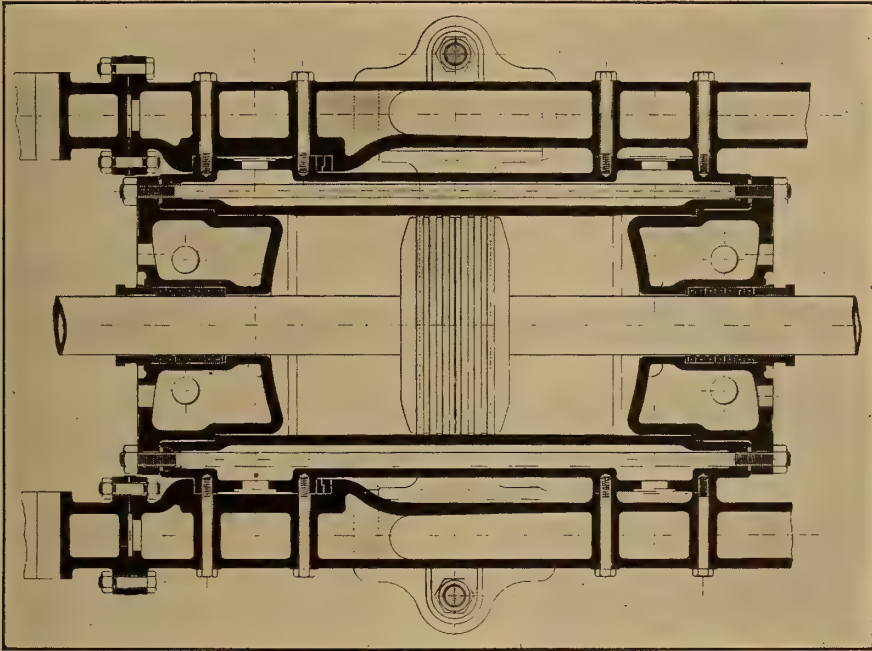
SECTIONAL VIEW OF GAS-ENGINE CYLINDER. JOHN COCKERILL COMPANY, BELGIUM
